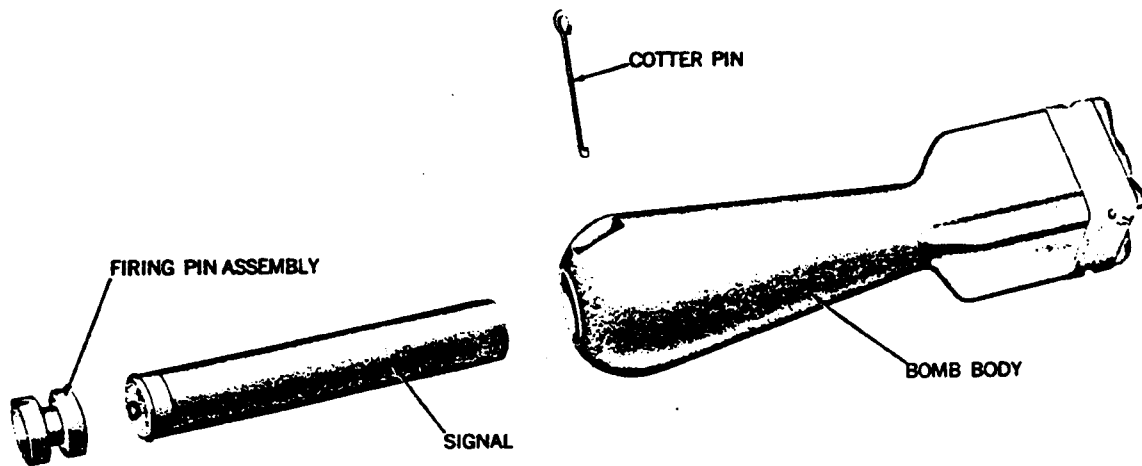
3-lb Miniature Practice Bomb AN-Mk 23 Mod 1, Exploded View.
